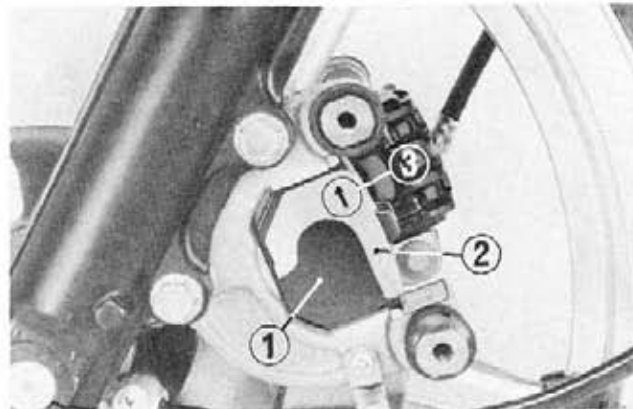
① Brake pad ② Shim ③ Arrow
